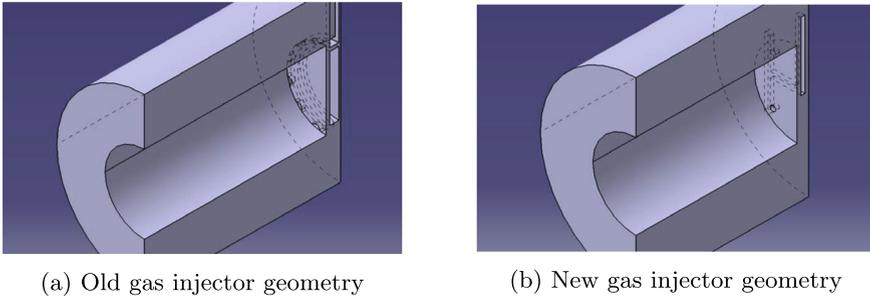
CAD model of the simulated geometries for the old (left) and new (right) gas injector design and discharge channel
